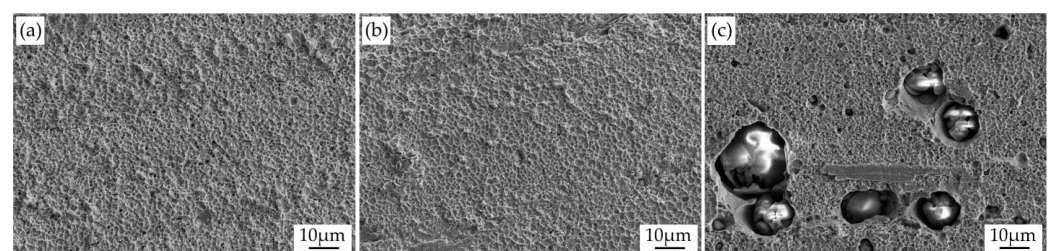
Shear fracture morphologies of the 304 stainless-steel joints brazed using Ag10CuZnSn-xIn-yGa filler metals: (a) Ag10CuZnSn, (b) Ag10CuZnSn-1.5In-2Ga, (c) Ag10CuZnSn-3In-3Ga.
